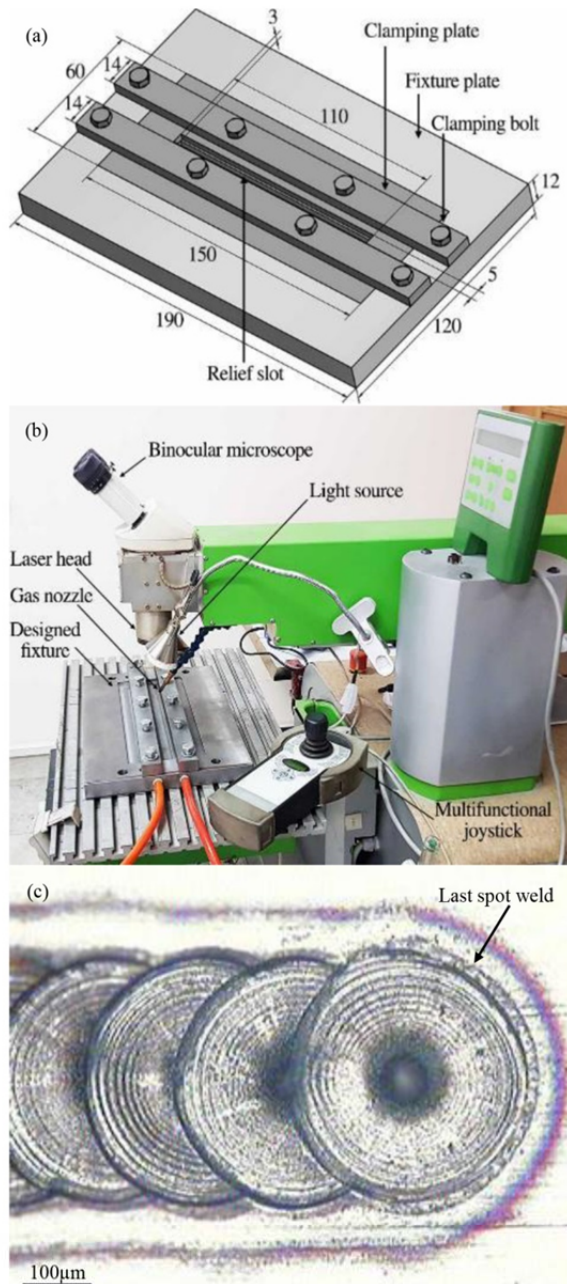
a- Designed fixture, b- actual image and schematic images of laser welding process, c- image of the part of produced weld line
